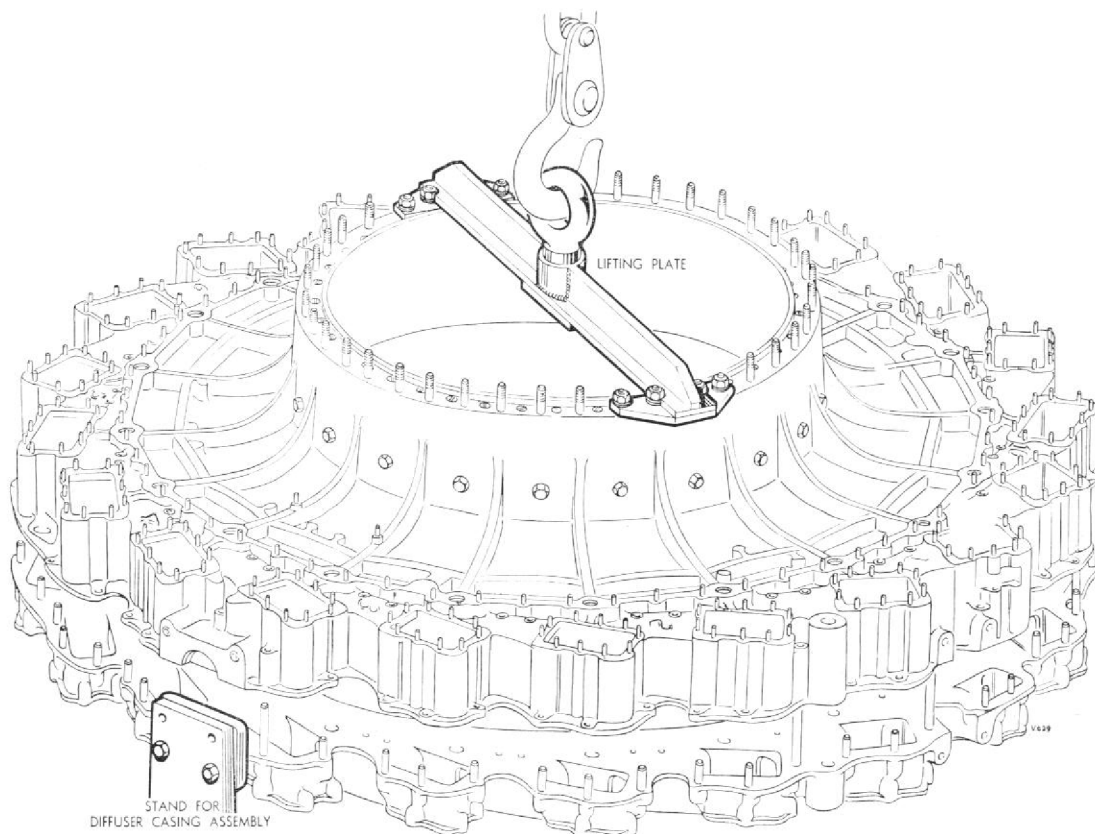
Lifting plate T.72765 attached to diffuser casing.
